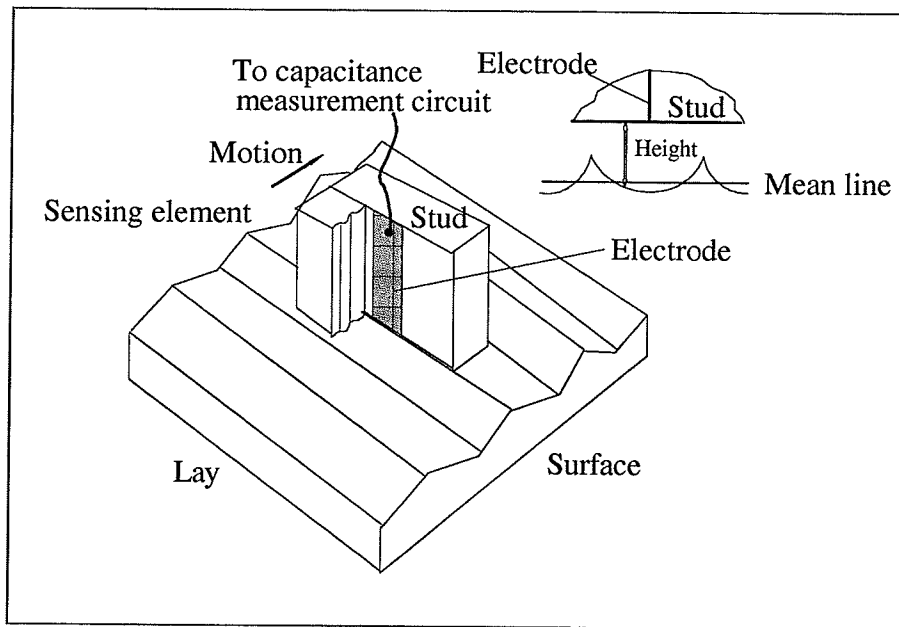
Cutaway view of the fringe-field sensor on a one-dimensional surface.
